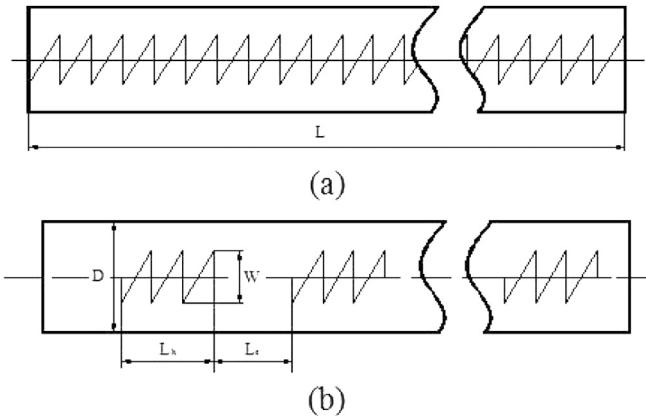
Helical screw-tape in a tube, (a) Full-length helical screw-tape; (b) regularly-spaced helical screw tape.
